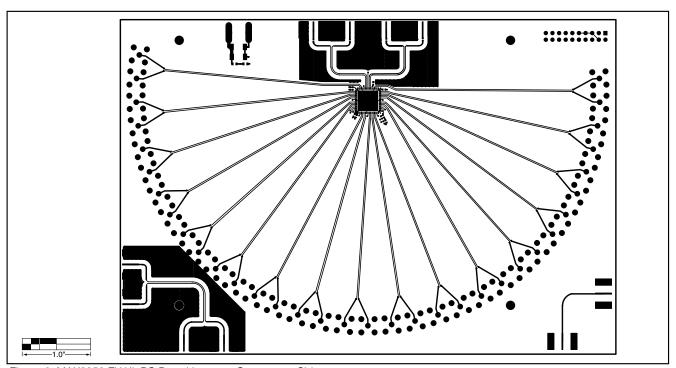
MAX3950 EV Kit PC Board Layout—Component Side
